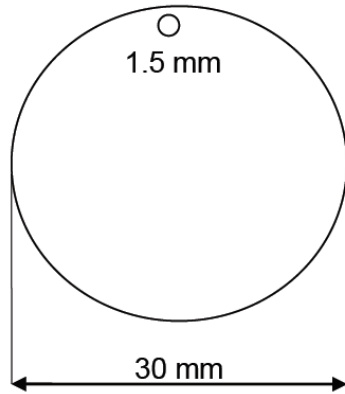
Dimensions for sample used in OM, EDS, hardness test and modified ASTM G48 test [59].
